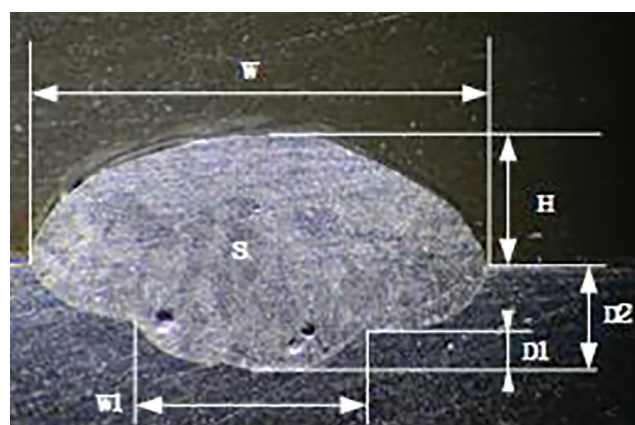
Measurement of the weld pool cross-section.
